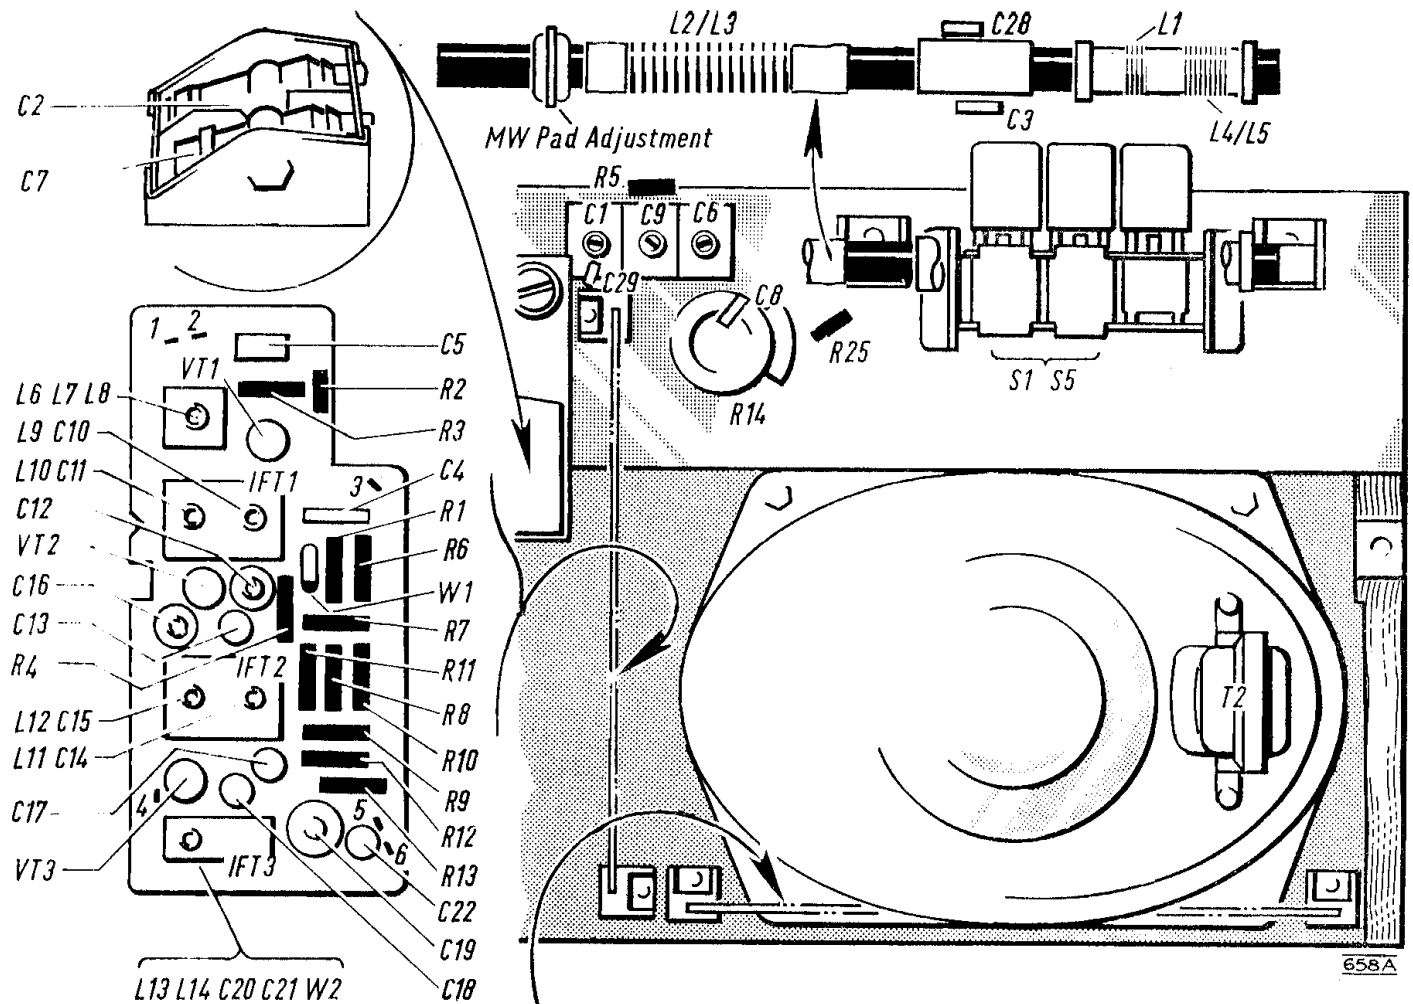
View of the receiver chassis with the printed boards withdrawn from their mountings. VT6 and VT7 are coated with silicone grease to ensure effective heat transfer and mounted in a heat sink. Also shown are the positions of trimmers and coil adjustments used in alignment. VT1, 2 and 3 are type AF117 or OC170.
